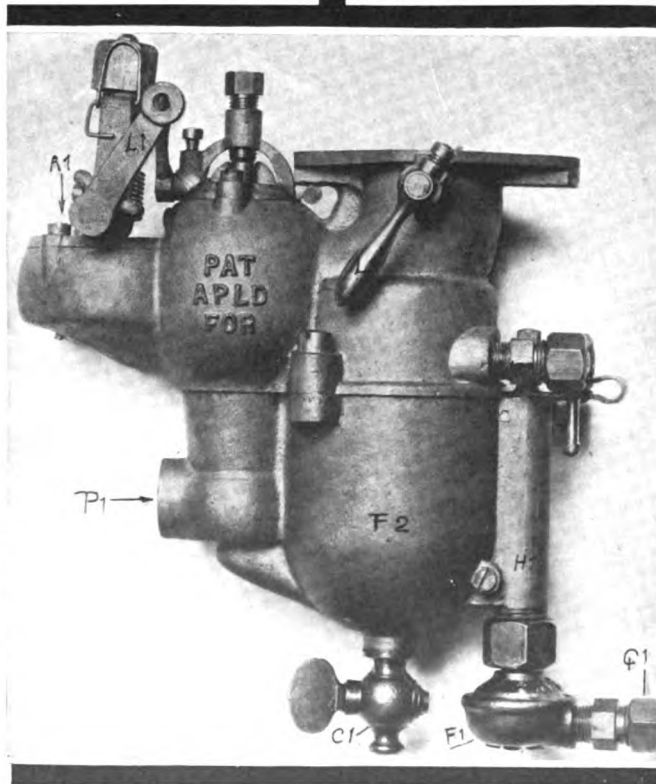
Depicting the carburetor looking at the side showing the lever control for auxiliary air valve
